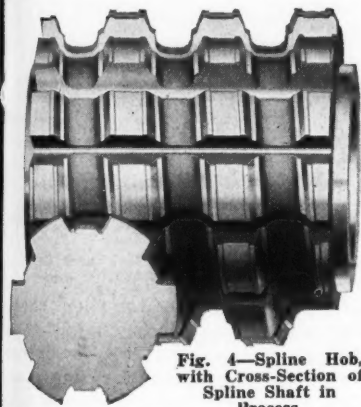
Spline Hob, with Cross-Section of Spline Shaft in Process.
